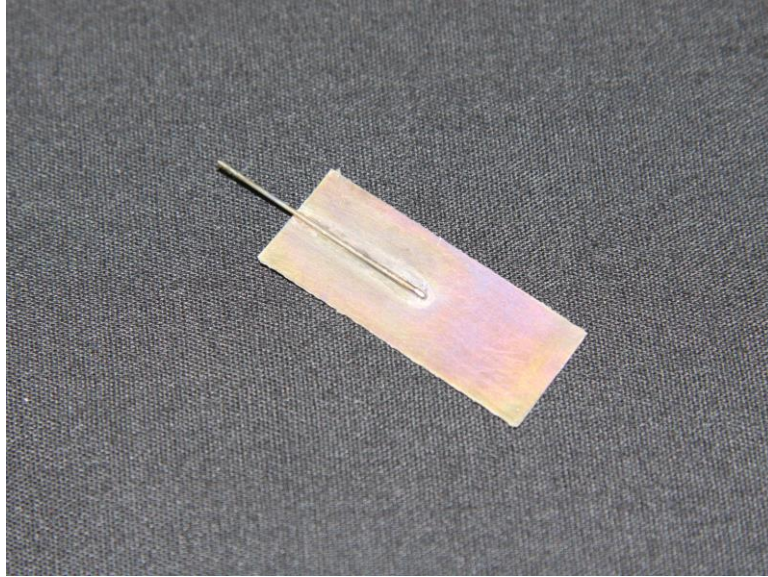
Flow Tab fabricated using silver solder to attach the tubing to the body
